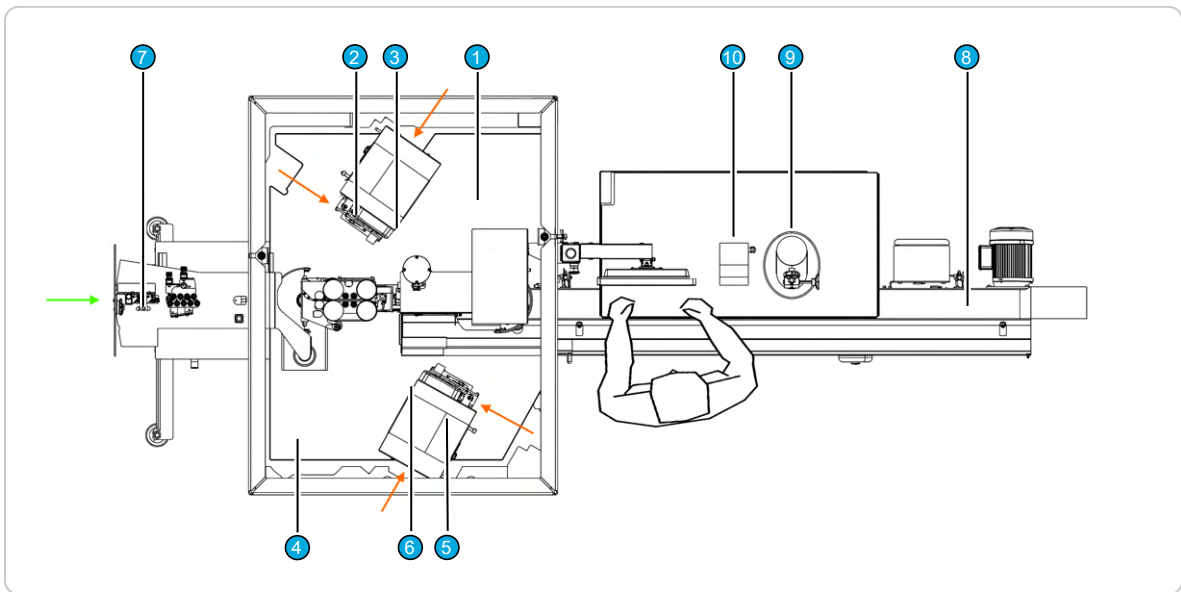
CrimpCenter 36 S - Sample Configuration - Crimp and Crimp
